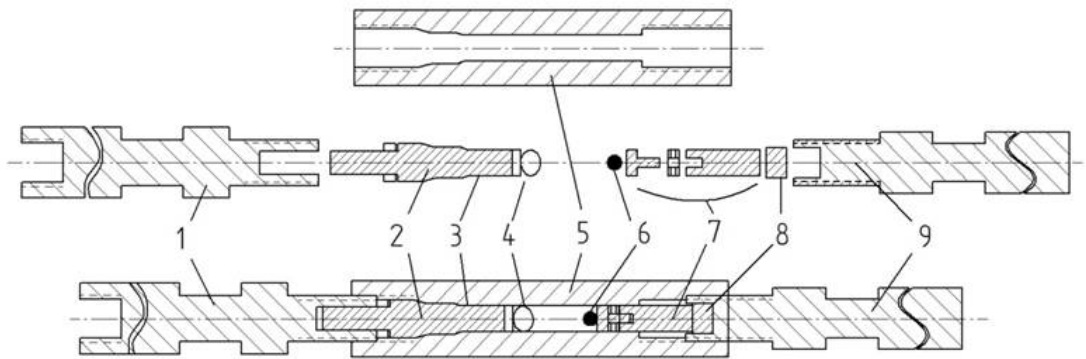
Schematic drawing of high pressure cell for MPMS designed by Kamarád and co-workers [30]. The cell is with 2.5 mm bore and outer diameter 8.6 mm; (1) upper clamping bolt, (2) plug, (3) seals, (4) sample on holder, (5) cell body, (6) Pb manometer, (7) piston with Bridgman mushroom-type seal, (8) piston backup, (9) lower clamping bolt. The figure was redrawn, not to scale.
